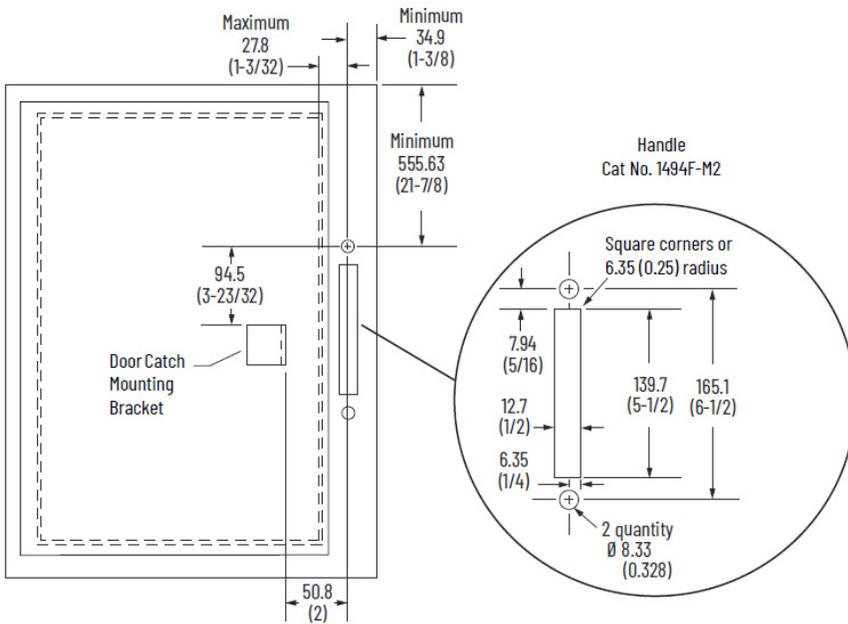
Enclosure without Handle Cutout: 1494V Variable Depth, Flange-operated Circuit Breaker Operating Mechanism
